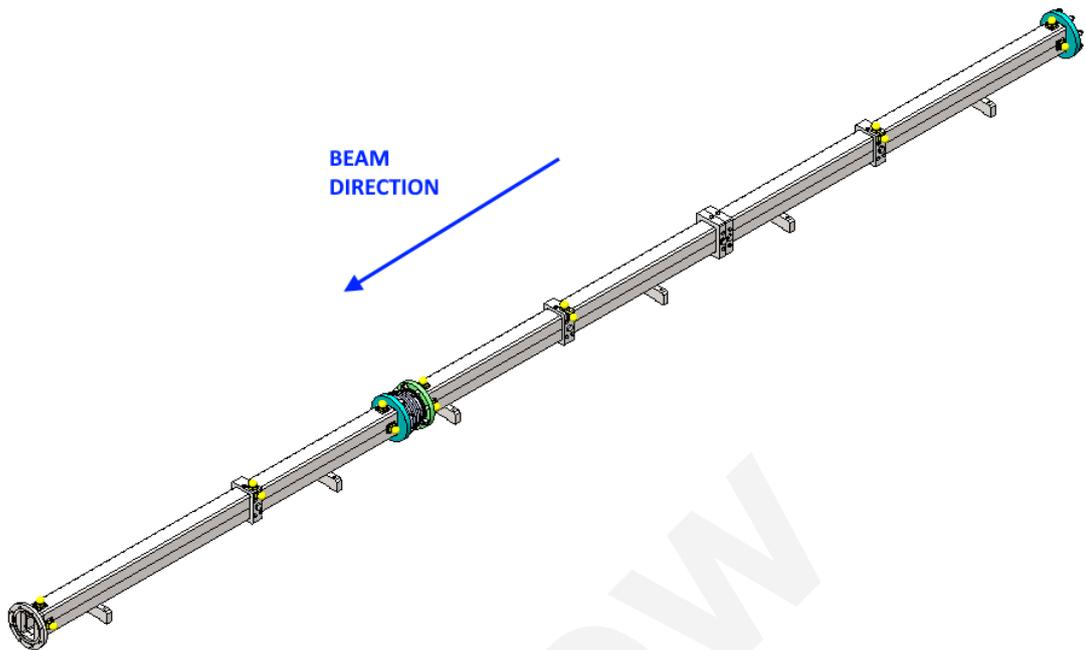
The vacuum housing assembly for W02-18 section of the neutron guide.
